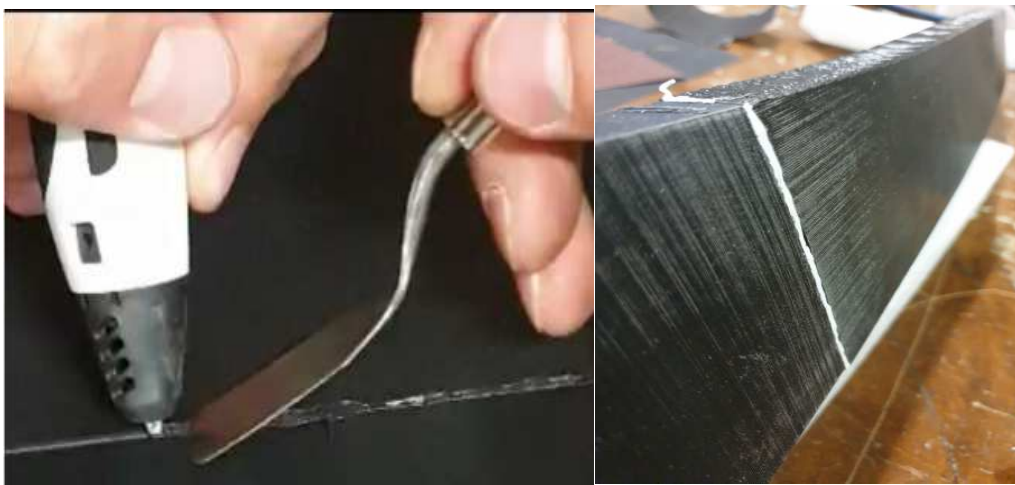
3D pen soldering operations and particular of hull mould soldered with HIPS
